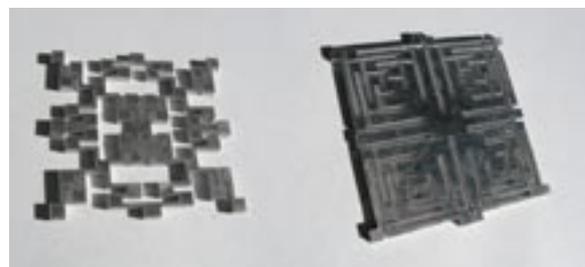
Flexures fabricated with a CNC Water Jet machine on 4mm aluminum
